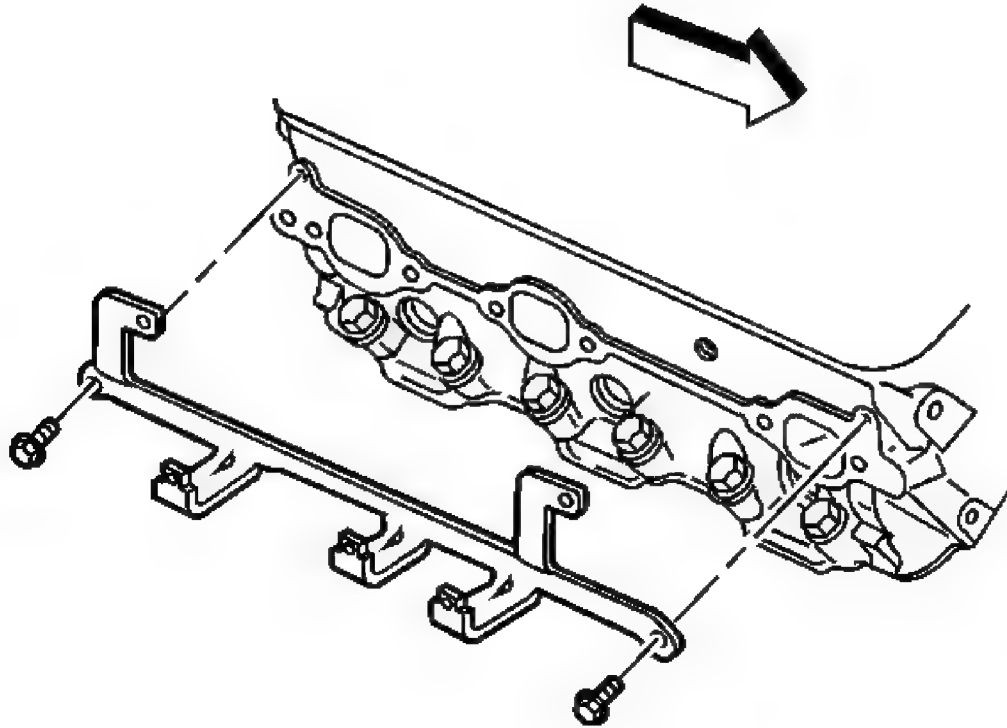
View Of Spark Plug Wire Support Bolt (Right)
